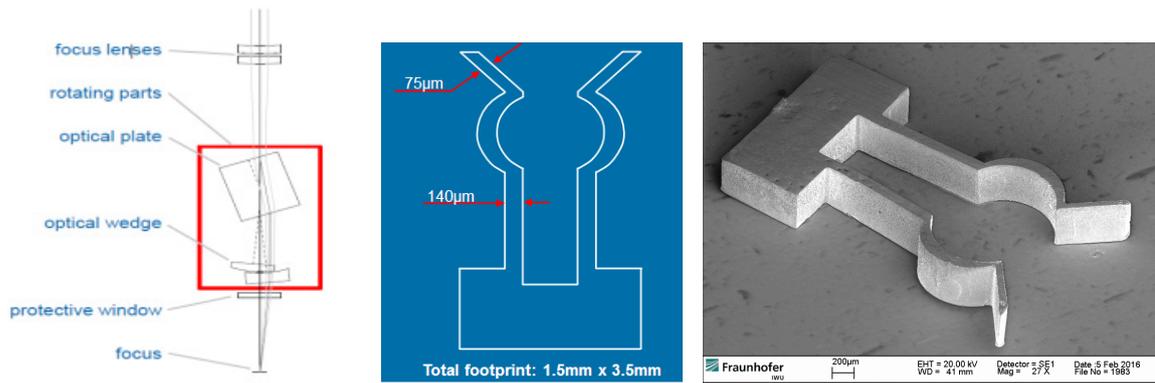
(a) Optical setup of the trepanning head; (b) Dimensions of the CuBe micro clamp; (c) SEM image of the fs-machined micro clamp made of 500 µm thick CuBe sheet.
